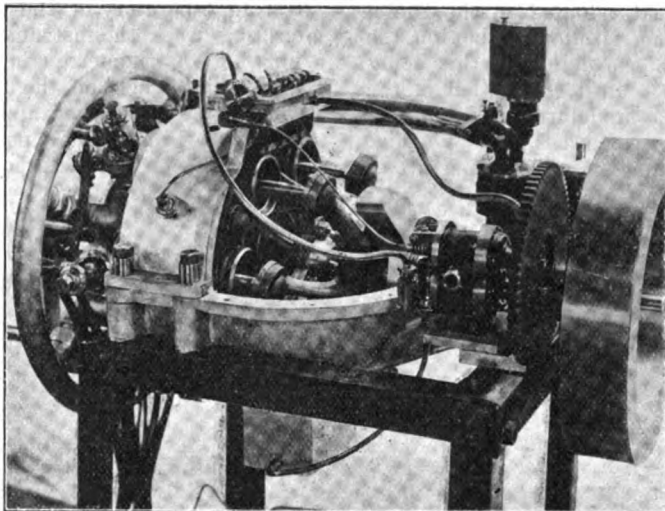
General view of the Lége Six Cylinder Engine with part of casing removed.
